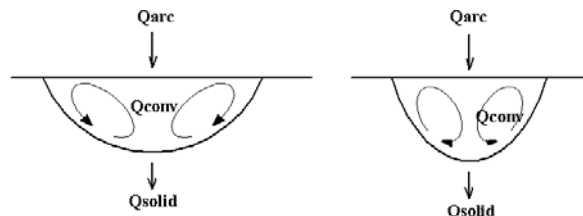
Penetration mechanisms in TIG welding at low currents
